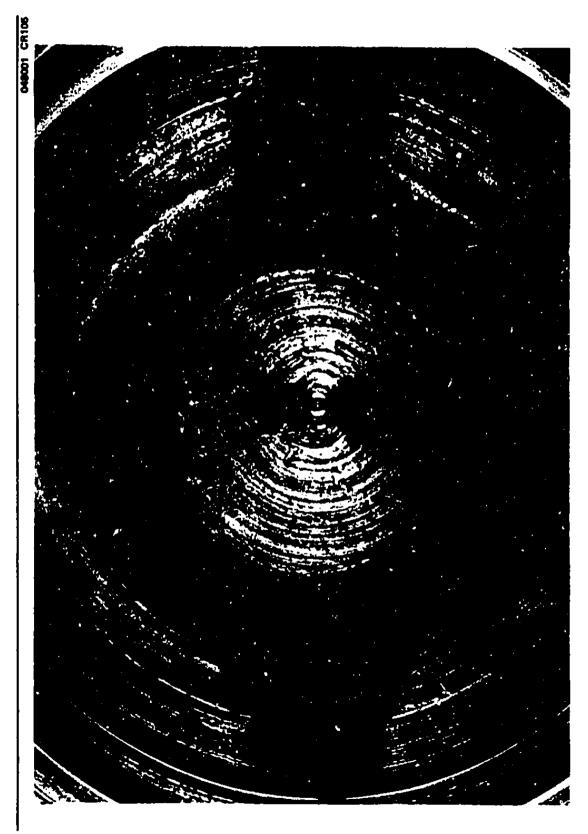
Inside View of Milton Roy Pump (P1) Head After Test
